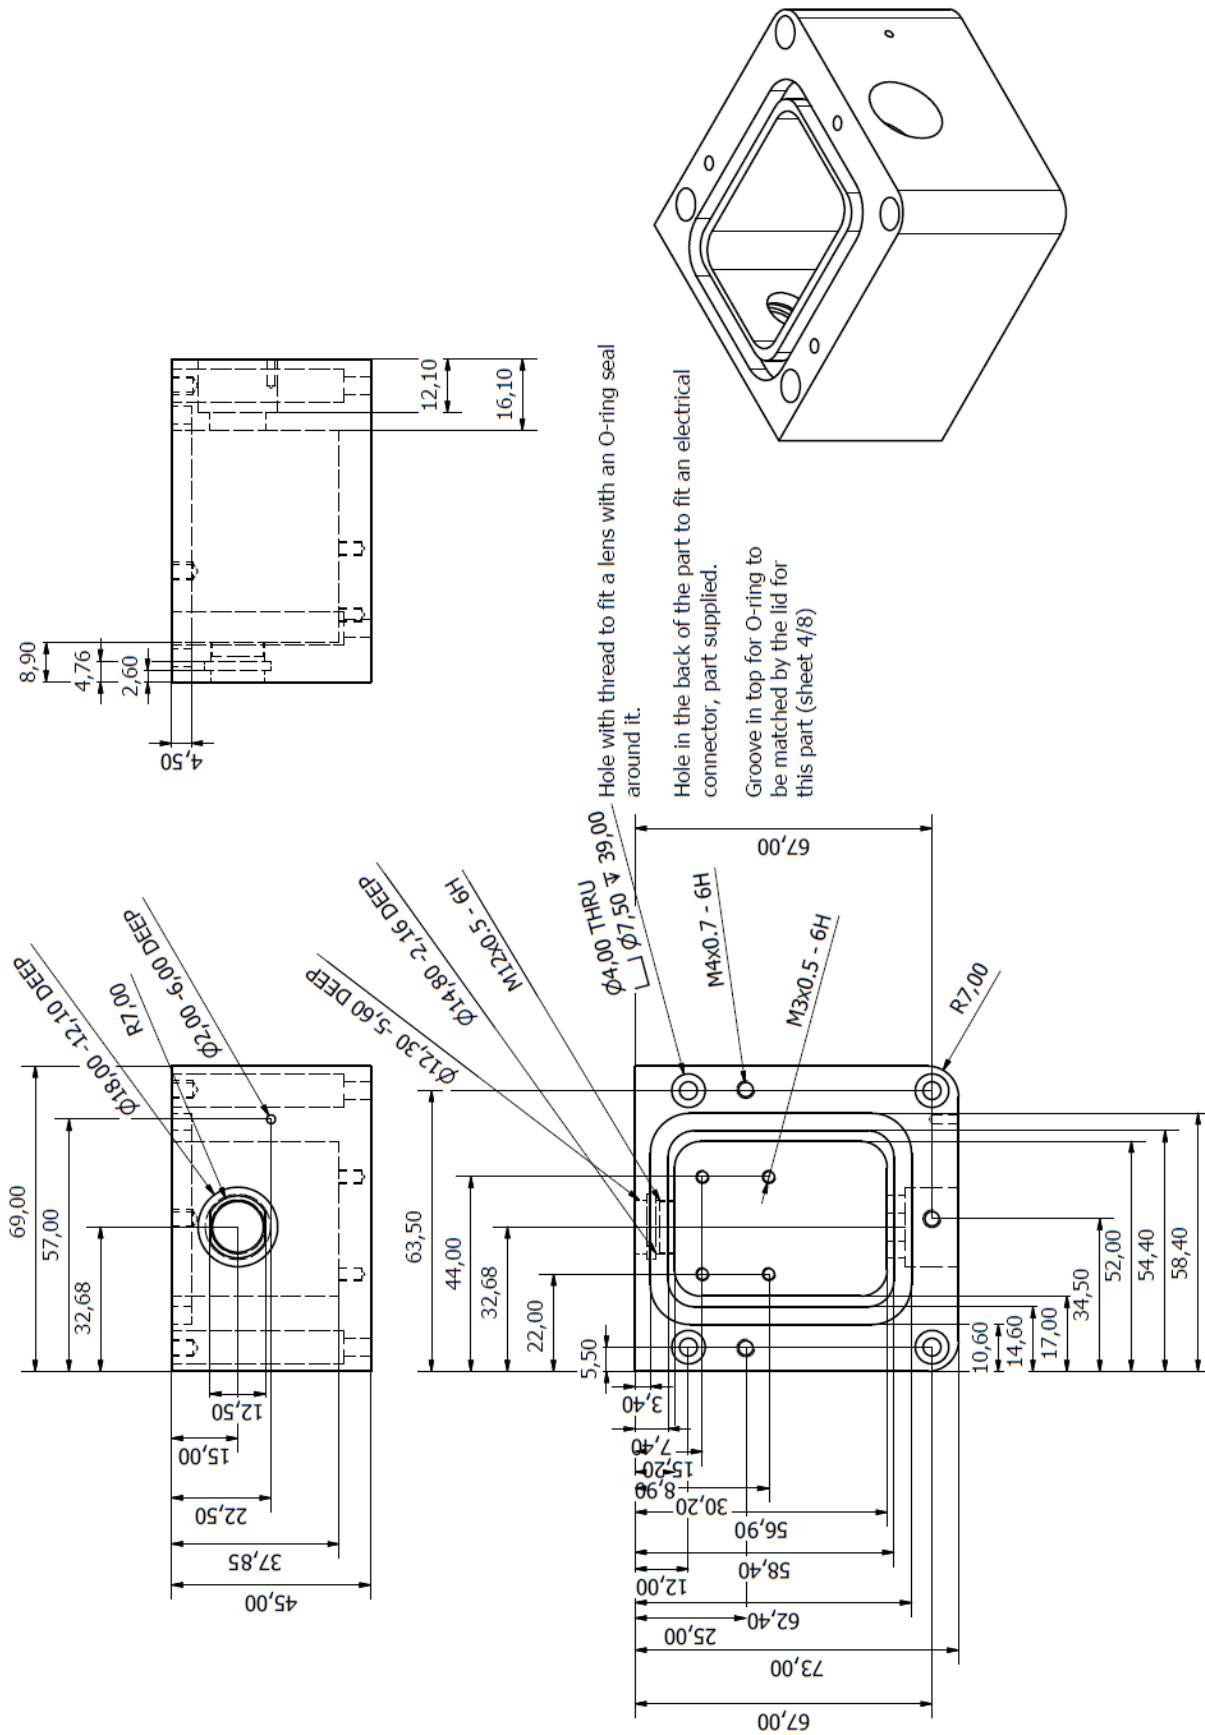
The engineering drawing for the laser diode compartment for the 399 nm laser, capable of being hermetically sealed.
